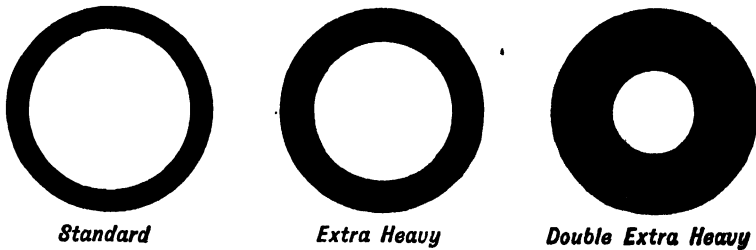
Full Size Sections of  $\frac{3}{4}$ -in. Pipe.
